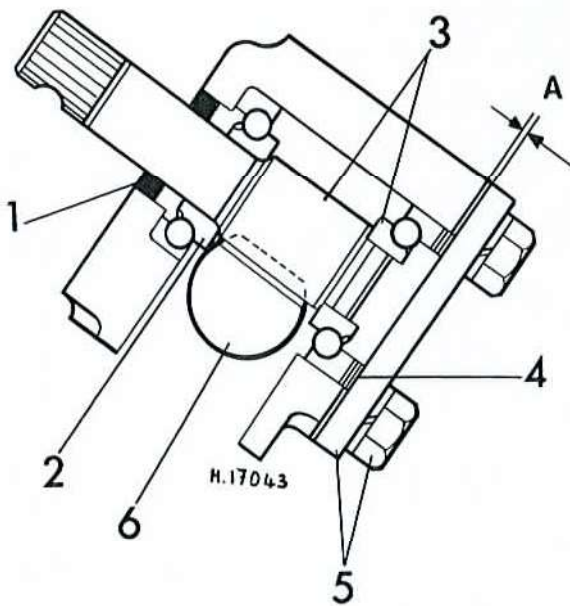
Reassembly of the pinion housing (Sec 30)
